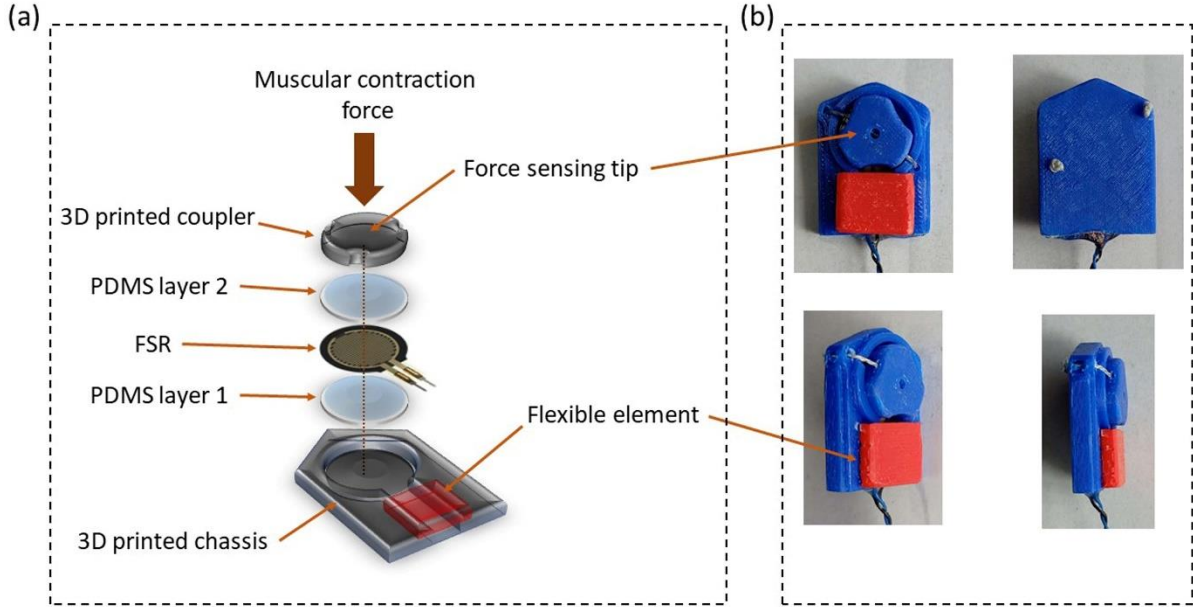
(a) Mechanical assembly of the proposed FMG sensor, (b) front, rear, and side views of the designed FMG sensor.
